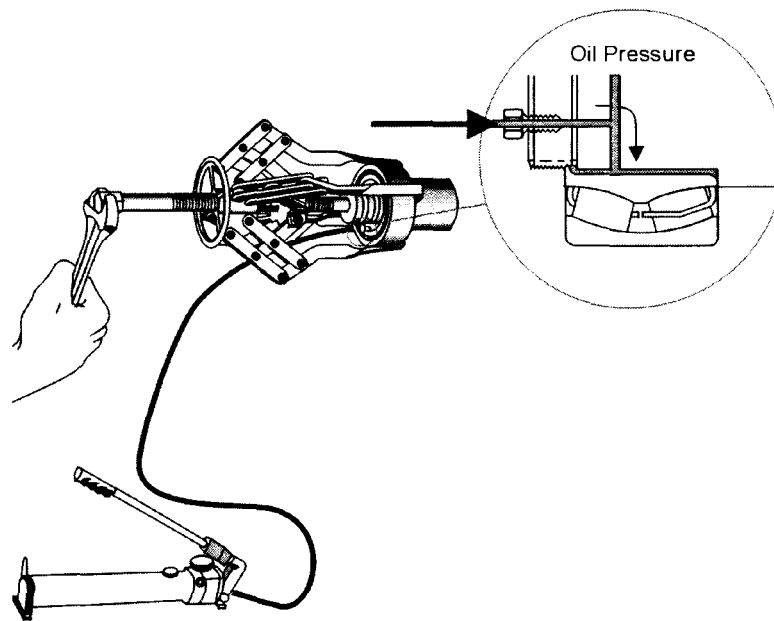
Removal using oil injection. (Courtesy SKF Canada Limited)
